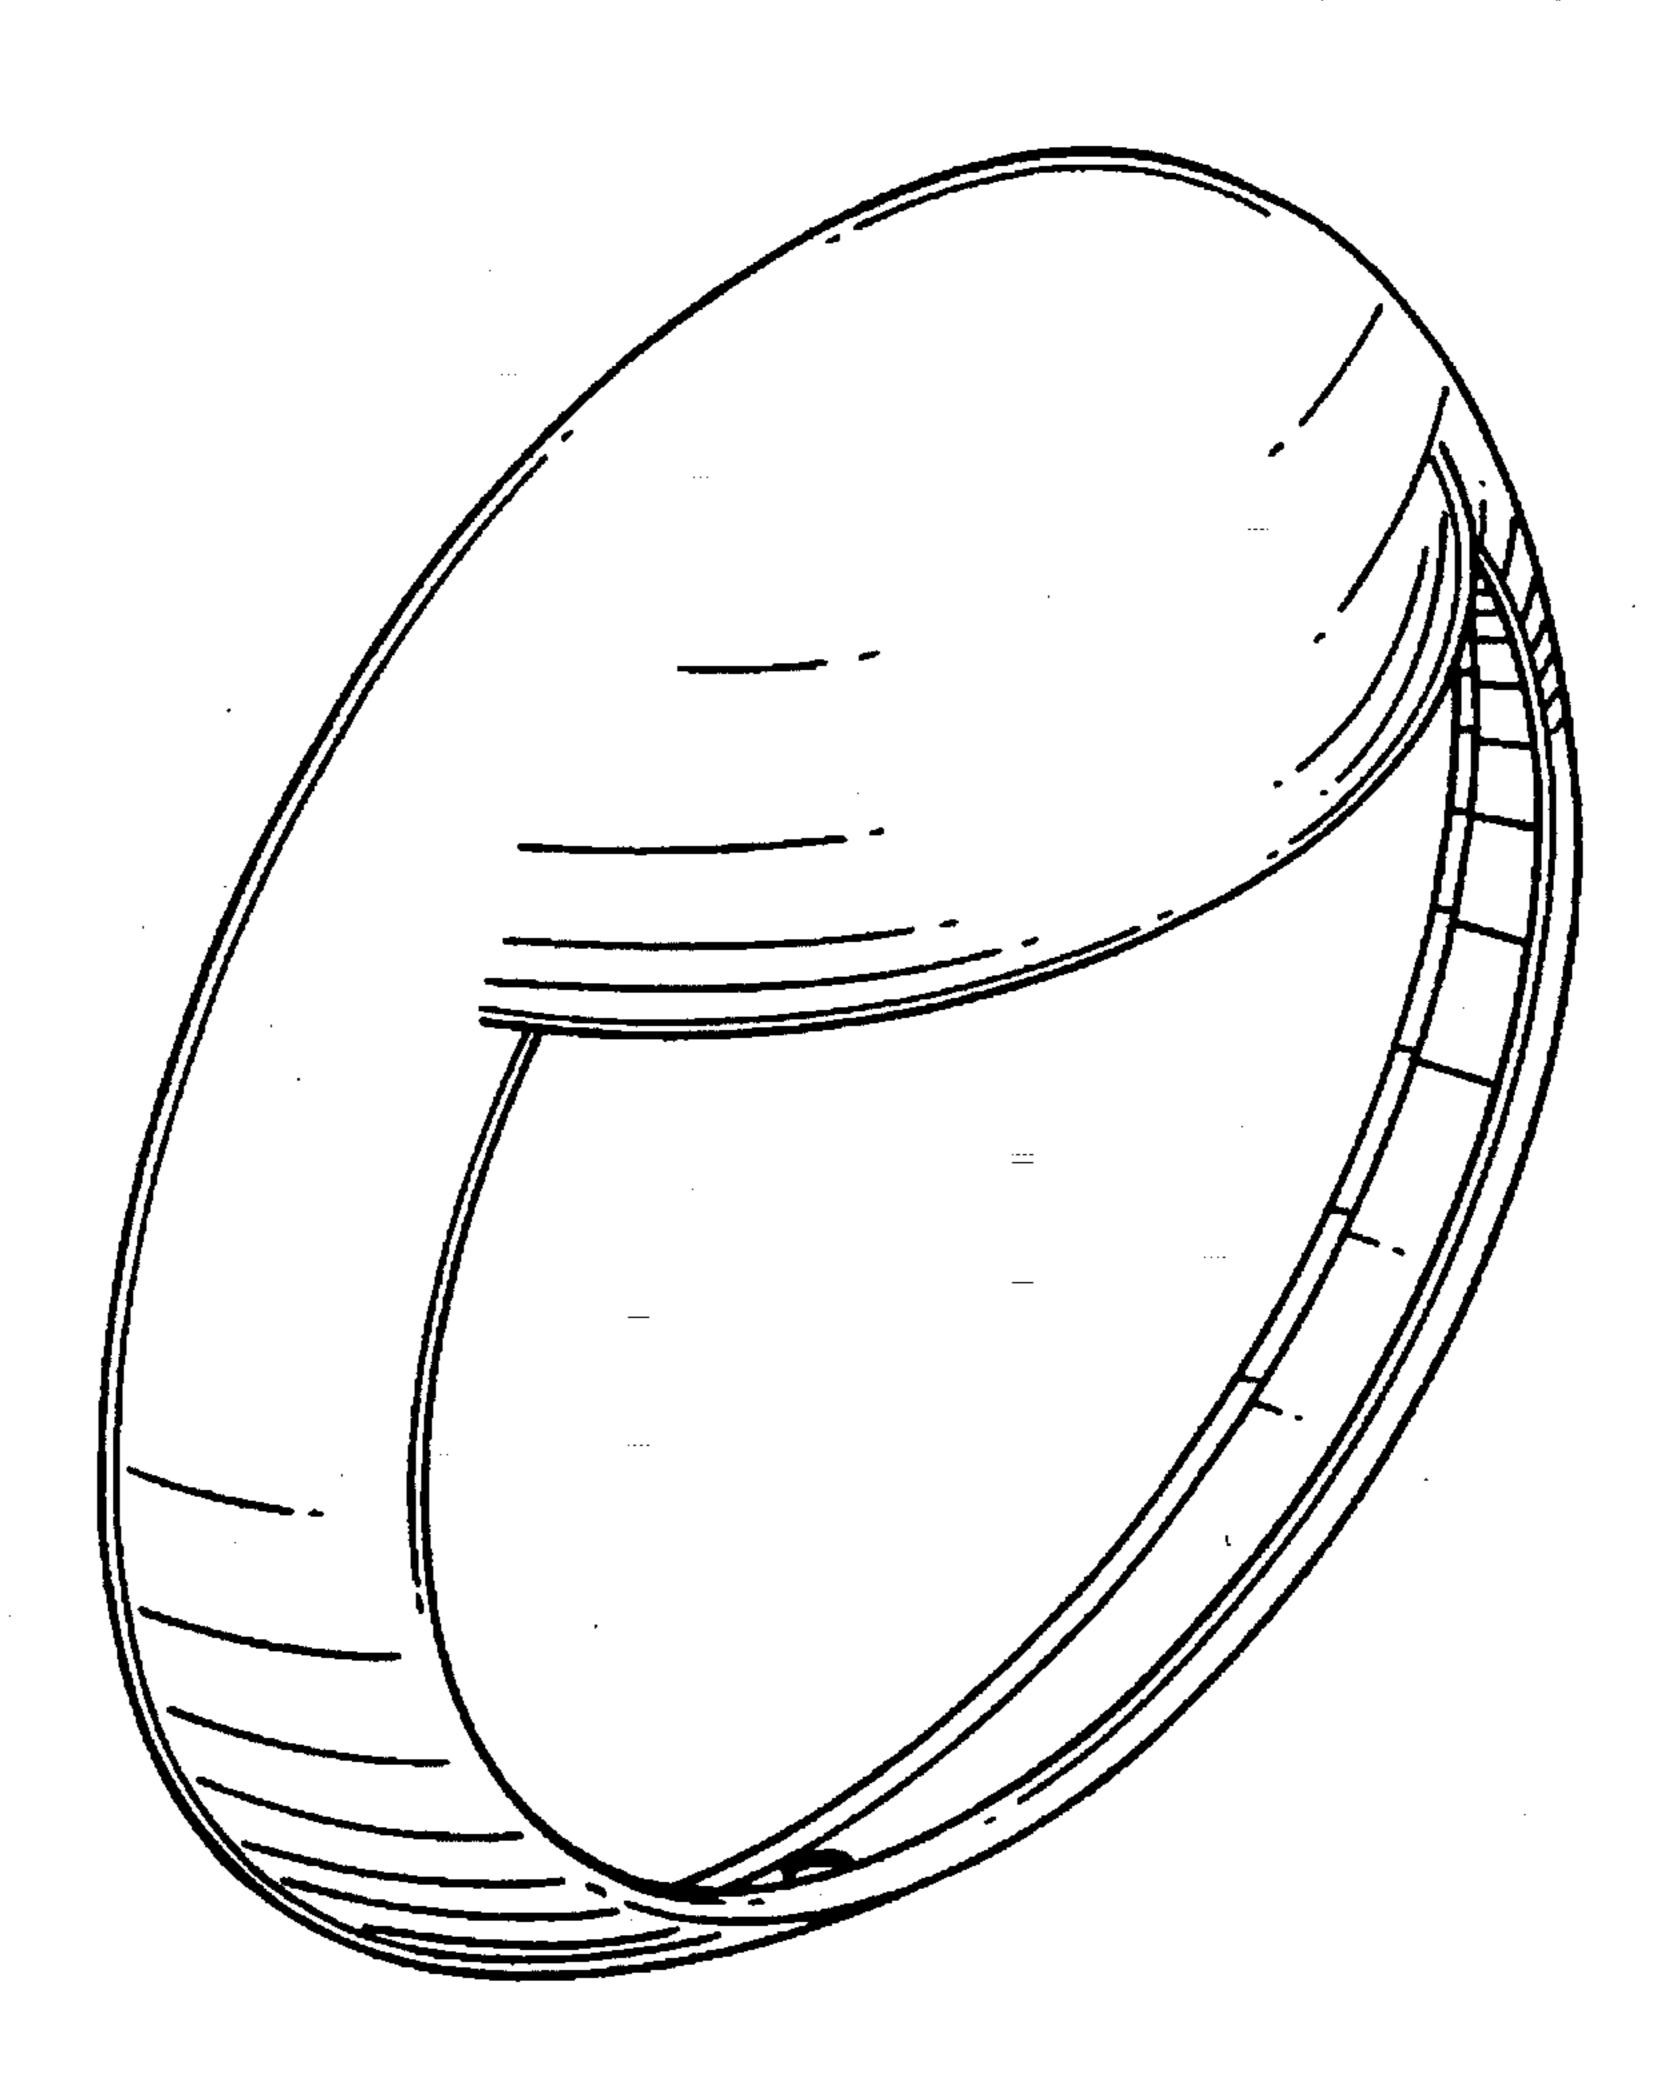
is a rear view of the combined headlight ring and visor for motorcycle;
